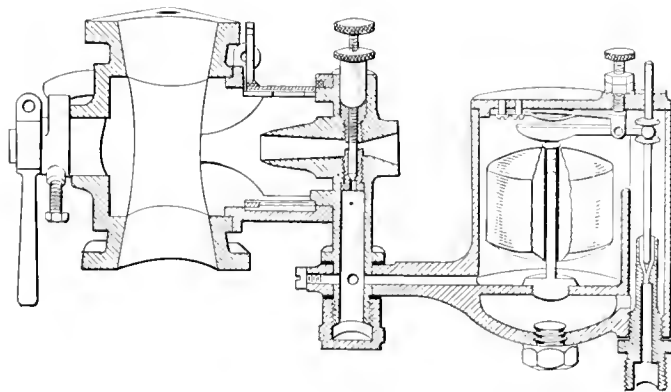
SECTION IN PERSPECTIVE OF THE COX CARBURETOR
